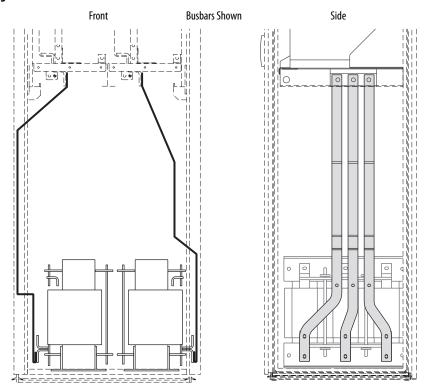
Frame 10...12 Cable Routing Example (Frame 10 Shown)
